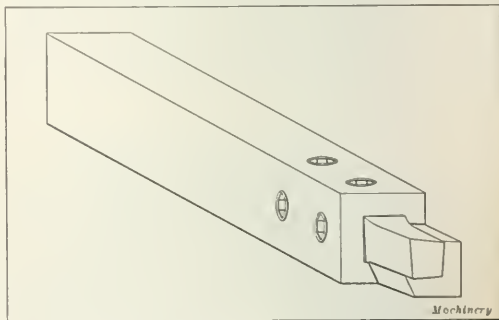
Scrapers for Flat Surfaces fitted into Handle shown in Fig. 2
